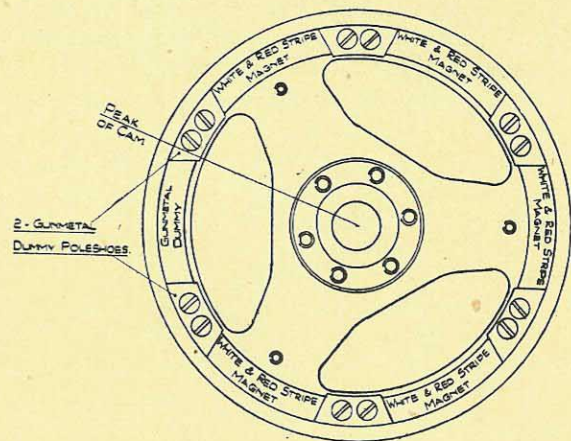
FLYWHEEL ASSEMBLY OF SIX-POLE 24-WATT MAGNETO.
